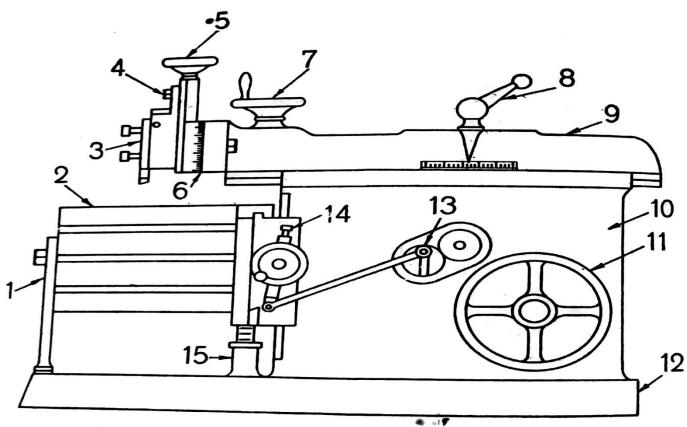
Parts of a standard shaper 1. Table support, 2. Table, 3. Clapper box, 4. Apron clamping bolts, 5. Downfeed hand wheel, 6. Swivel base degree graduations, 7. Position of stroke adjustment handwheel, 8. Ram block locking handle, 9. Ram, 10. Column, 11. Driving pulley, 12. Base, 13. Feed disc, 14. Pawl mechanism, 15. Elevating screw.
